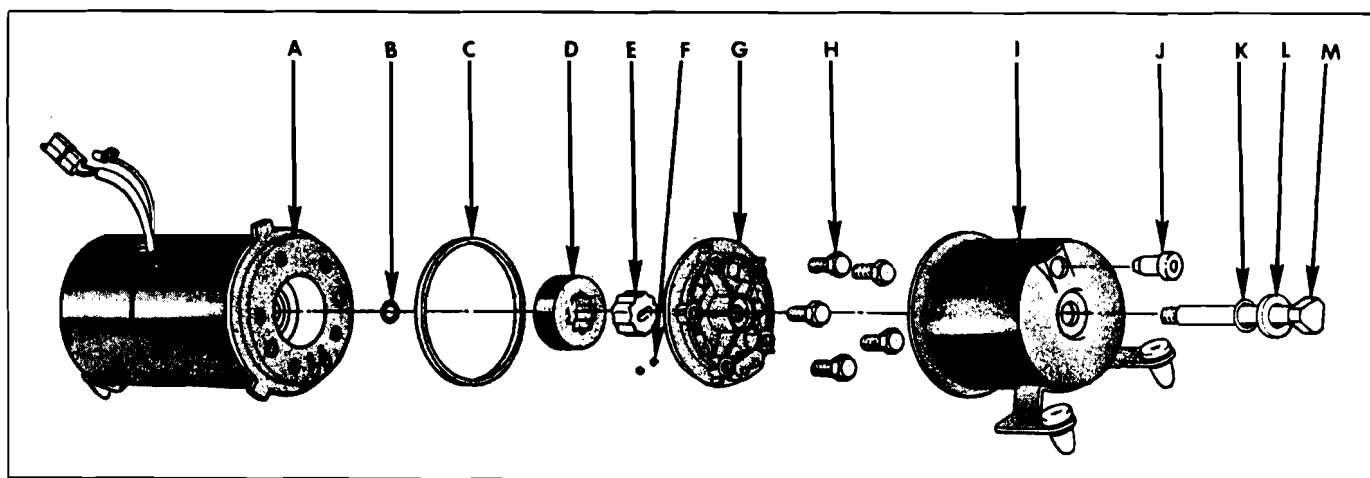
Motor and Pump Components - All 67 Styles Except "Z" Body
